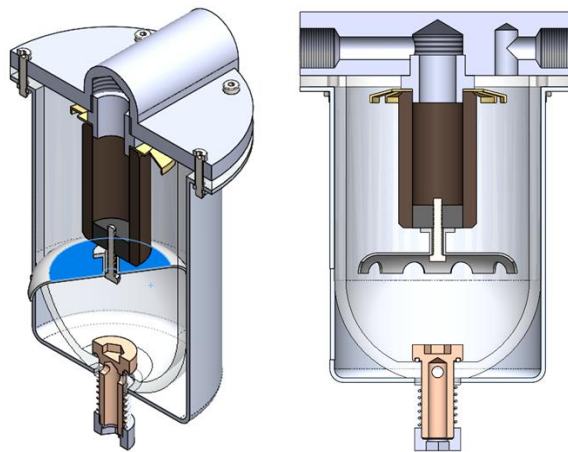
Sectioned filter assembly used in Experiment 2. Isometric (left) and Front View (right).
